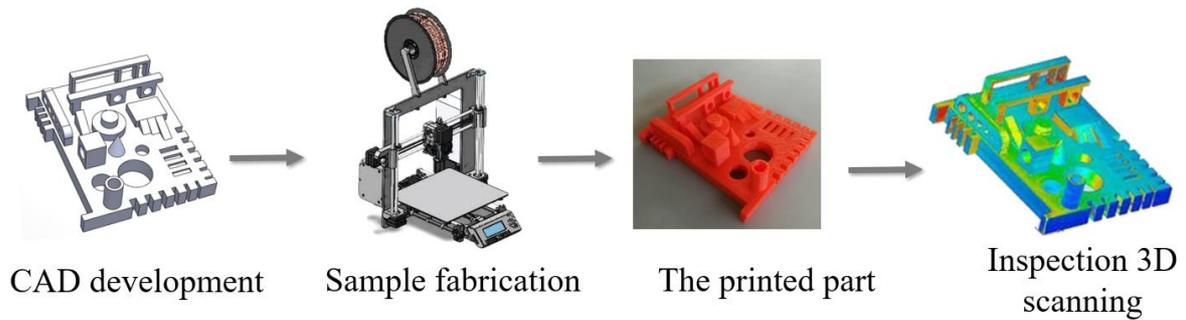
The process flow in experimental fabrication and inspection of dimensional accuracy
